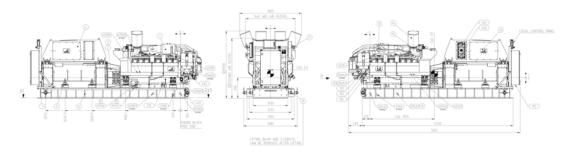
W16V14 Genset outline drawing (DAAF500353G)
